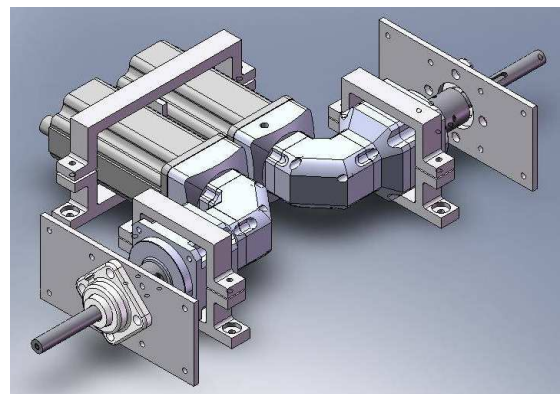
SolidWorks rendering of motor/gearbox configuration.
